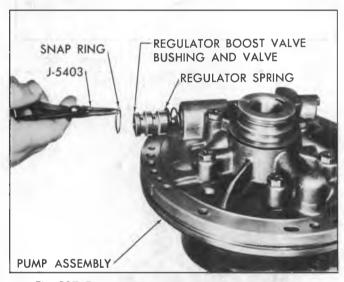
T--Removing Pump Regulator Valve Snap Ring
